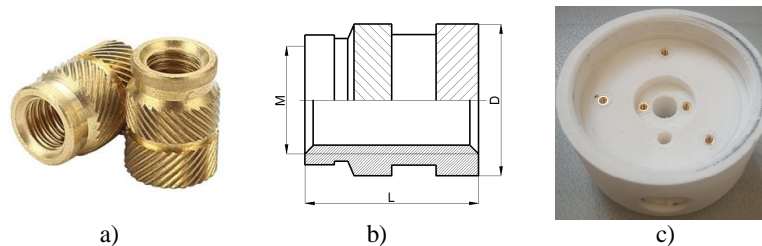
Brass hot melted inserts: a) image, b) technical drawing, c) position in central part
